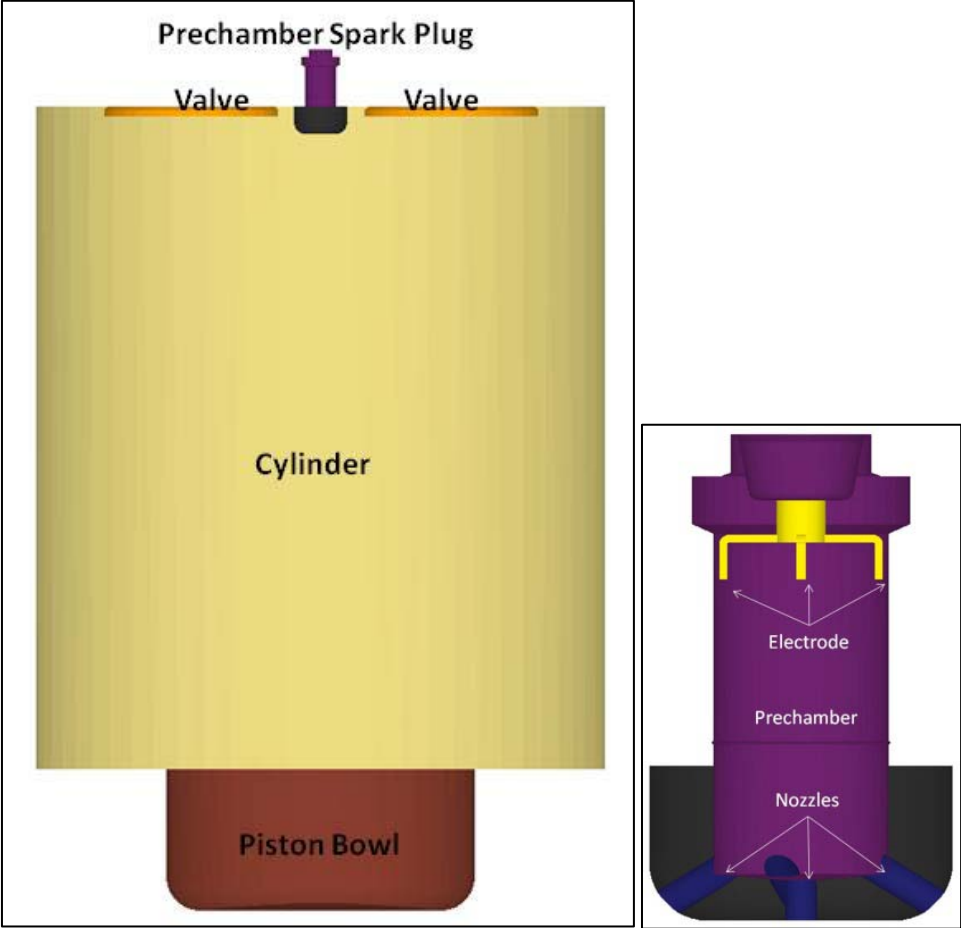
(a) Cross-sectional view of the simulated combustion space; engine and (b) prechamber plug.
